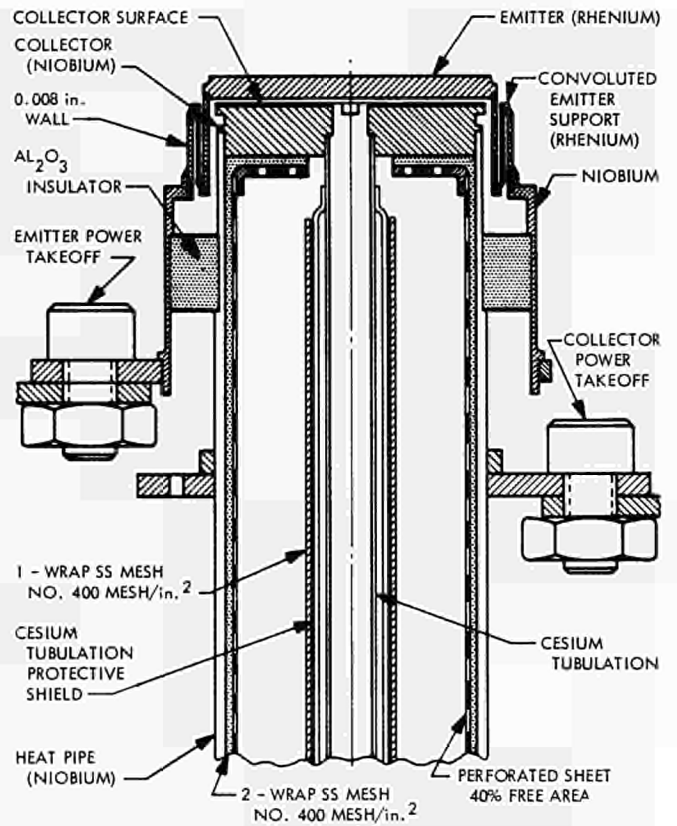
Convolute Emitter Support Structure and Heat Pipe Collector Assembly
